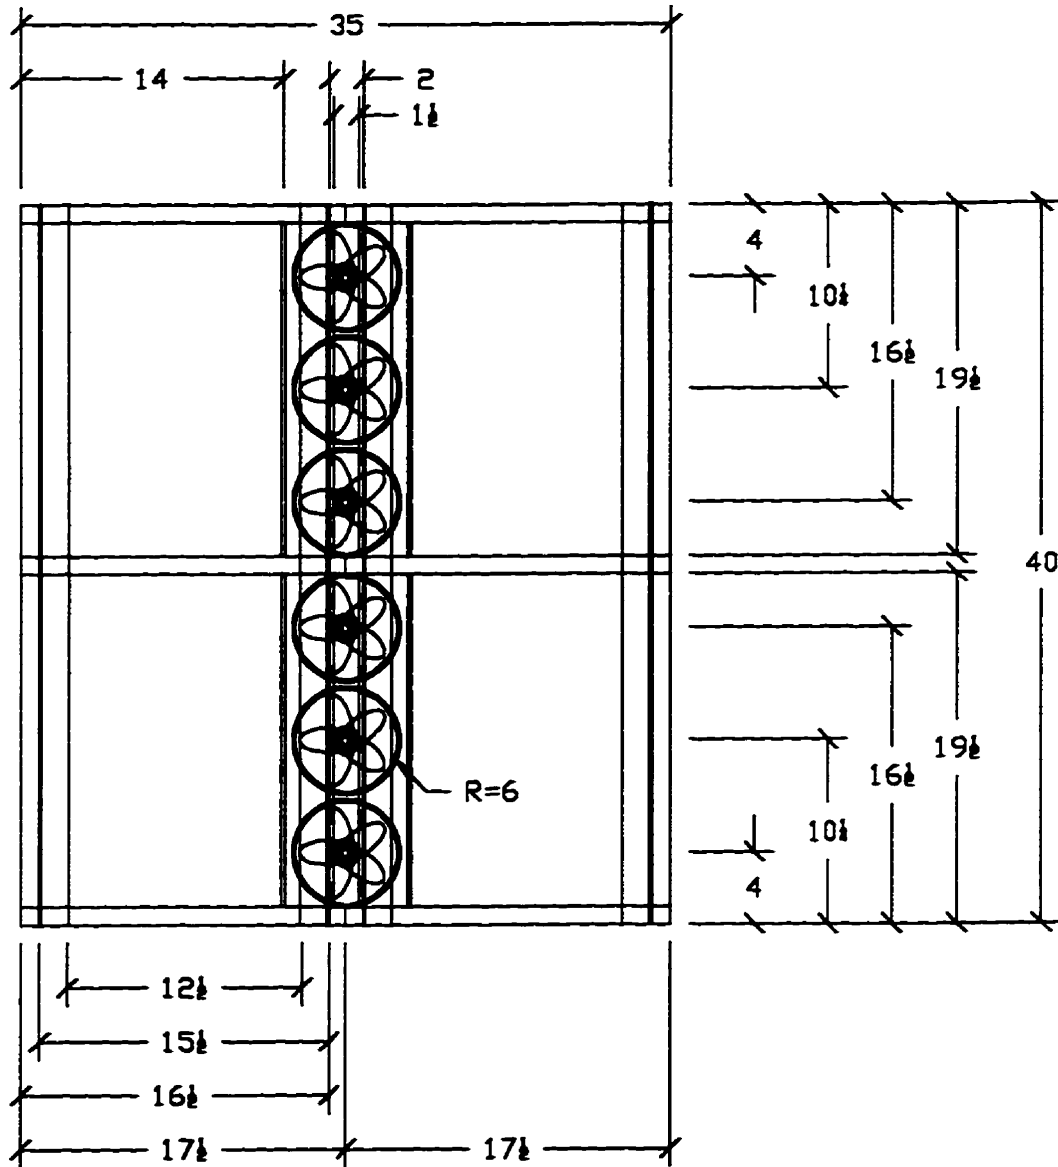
Top view of the shelving unit with Imperial dimensions (inches).
